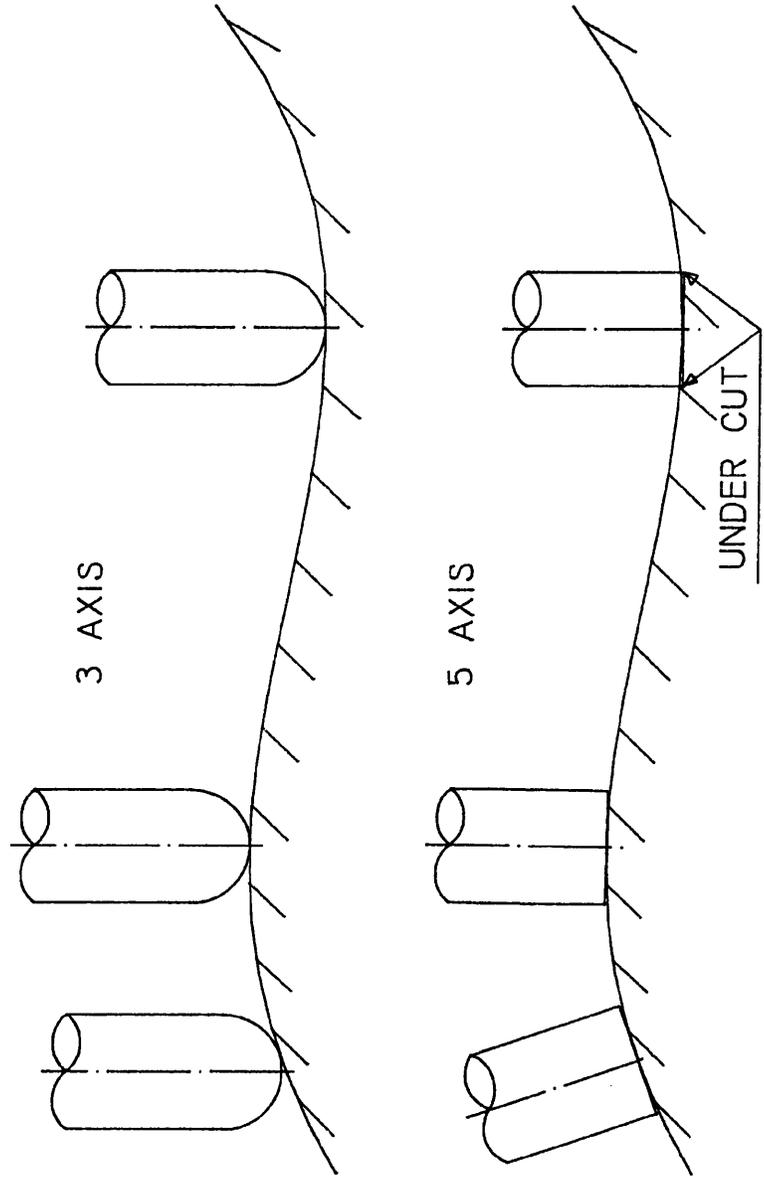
A comparison of 3- and 5-axis machining highlighting the foul condition when using non-canted 5-axis machining on concave surface
